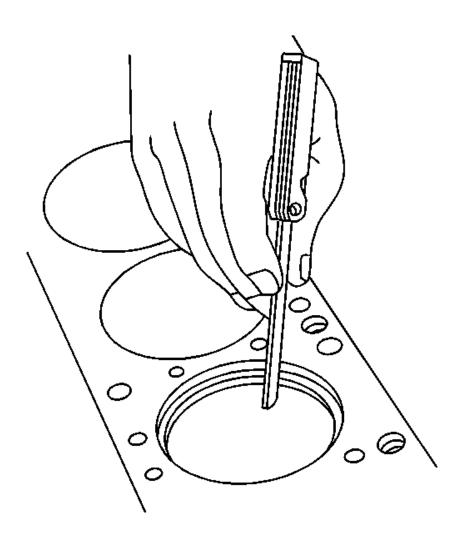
Measuring Piston Ring End Gap Courtesy of GENERAL MOTORS CORP.
